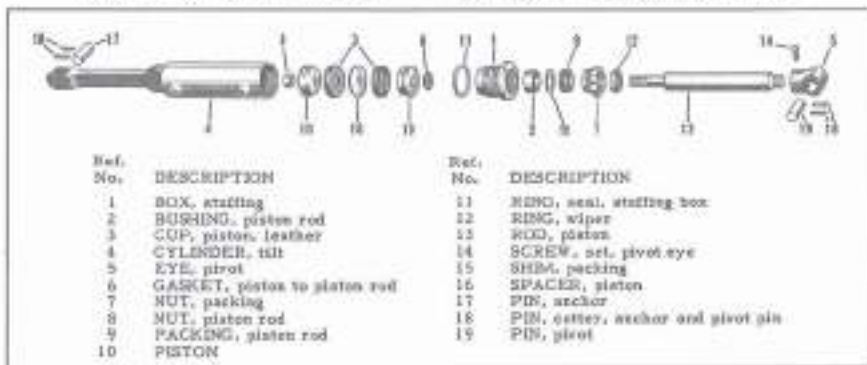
Tilt Cylinder and Mounting (Old Type)
